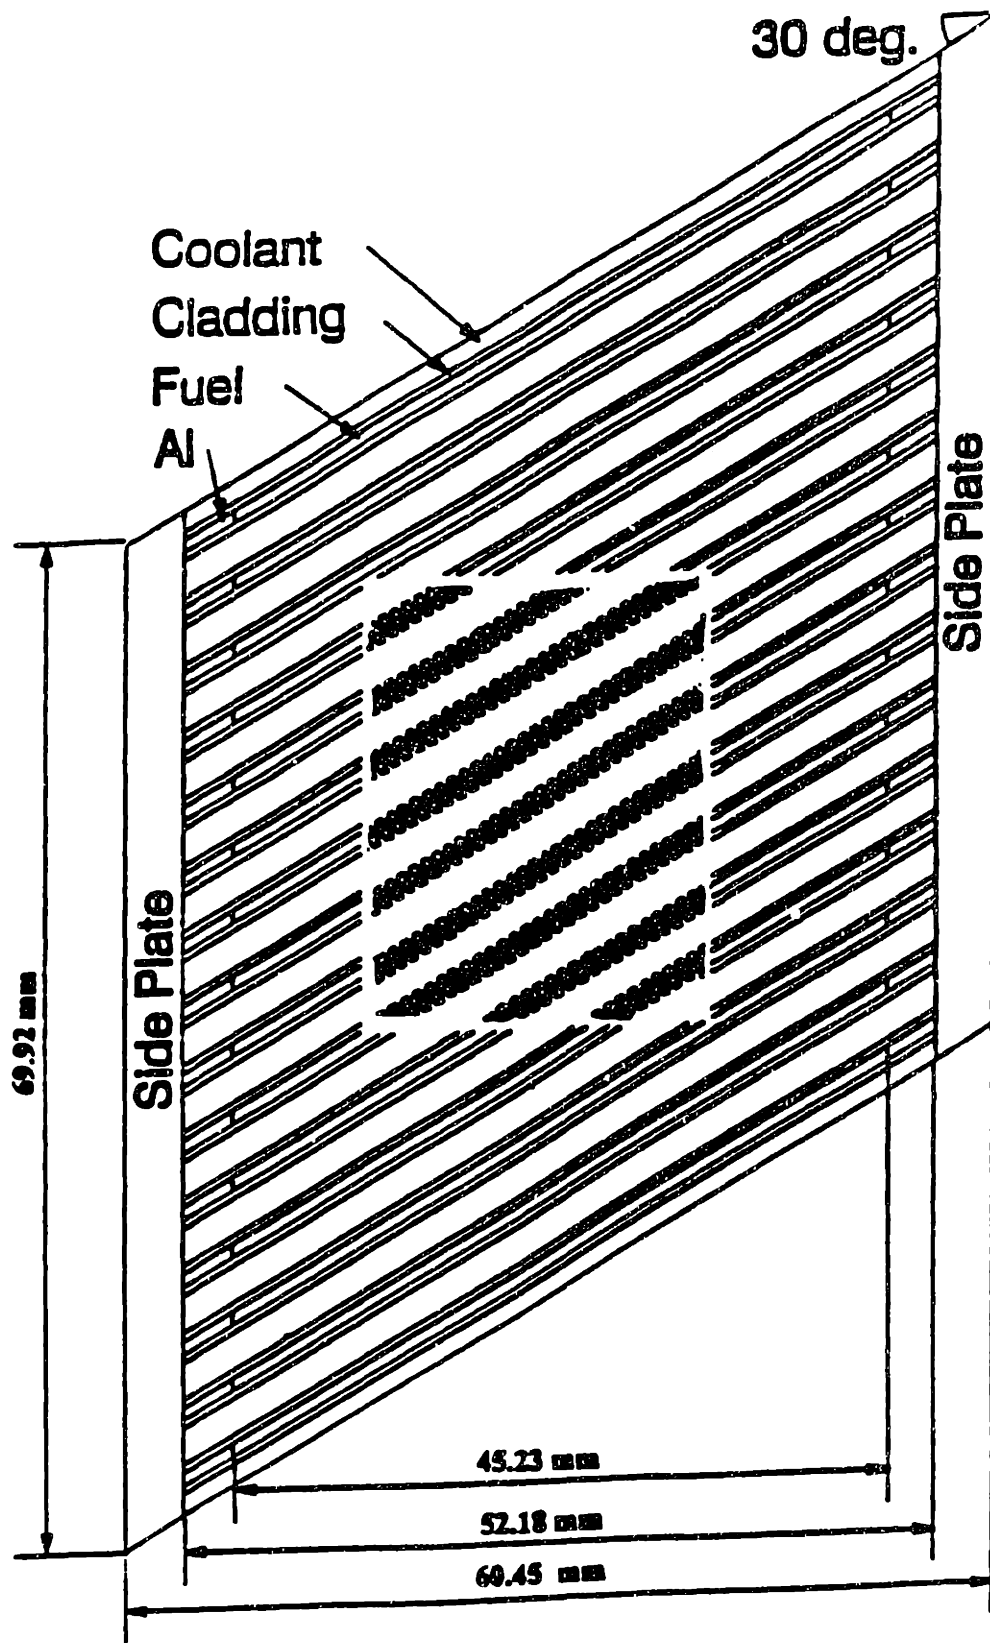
Cross-Sectional View of a Fuel Assembly⁸
